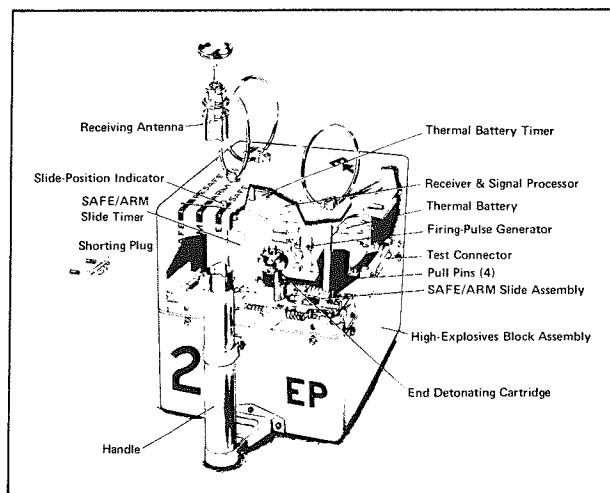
Lunar-Seismic-Profiling Explosives Package (Cutaway View)
